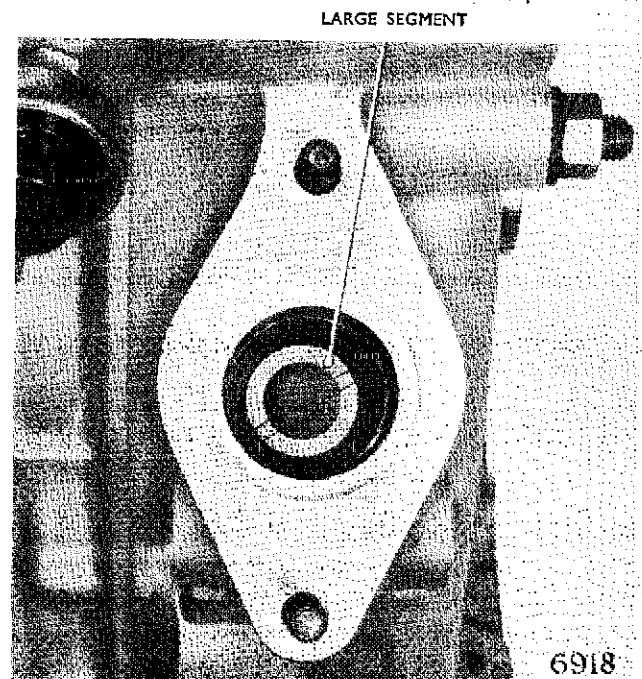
Position of oil pump drive for No. 1 TDC fixing
